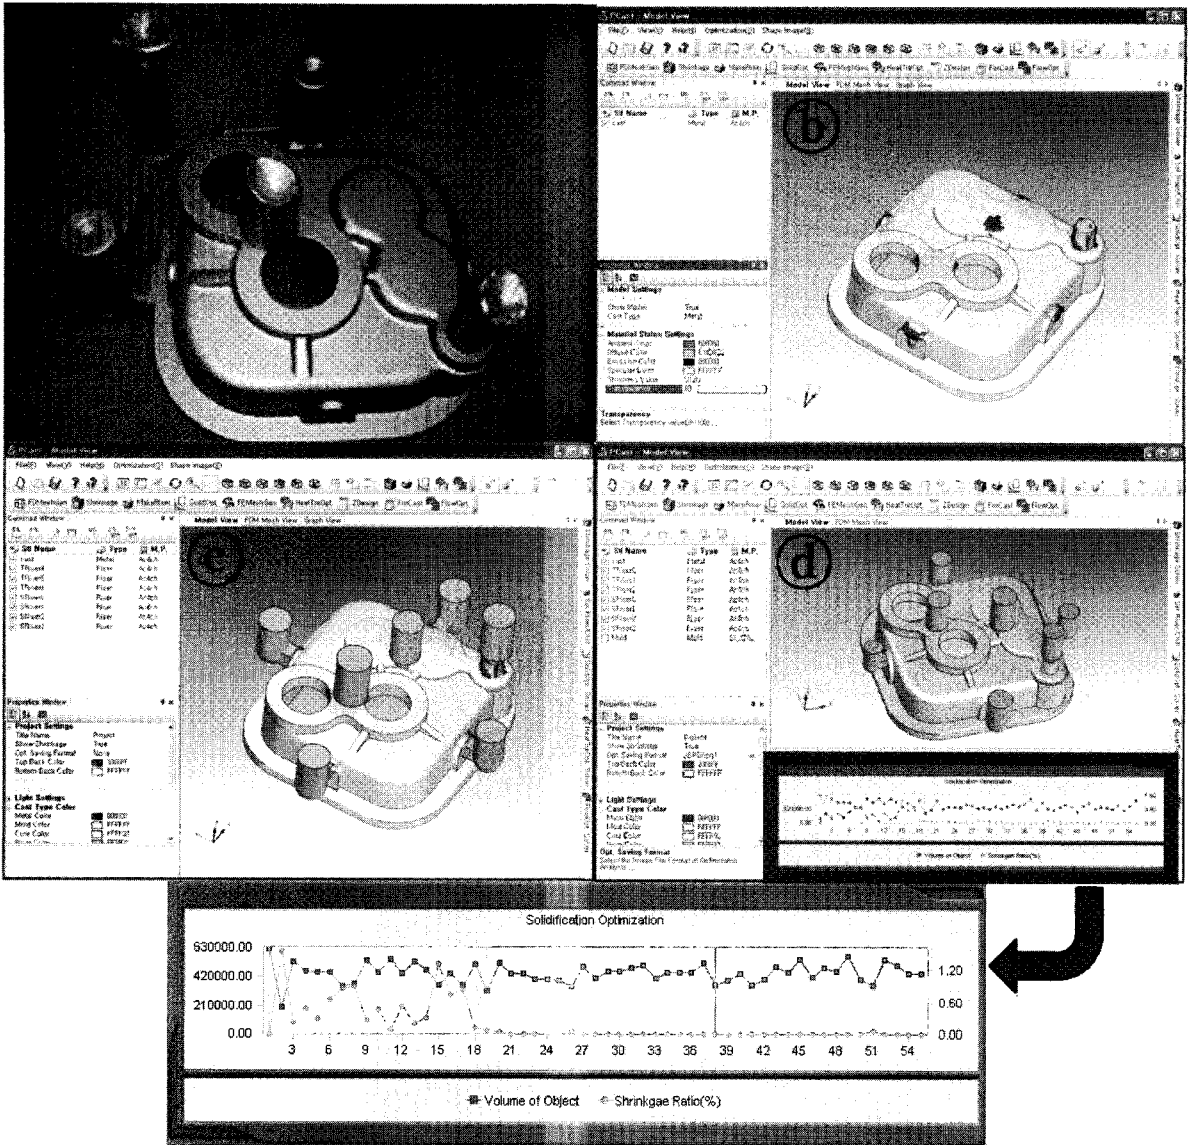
Example about making the optimum overflow design for die-casting process at rule-based modules
